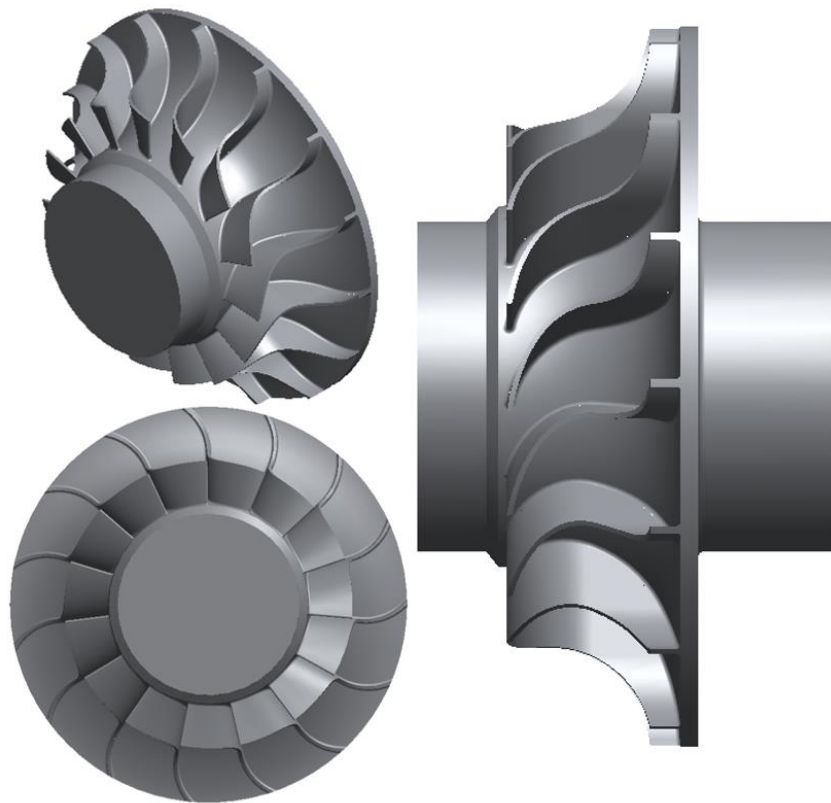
(Clockwise from Top left) Impeller-Iso, Impeller-Right, and Impeller-Front
